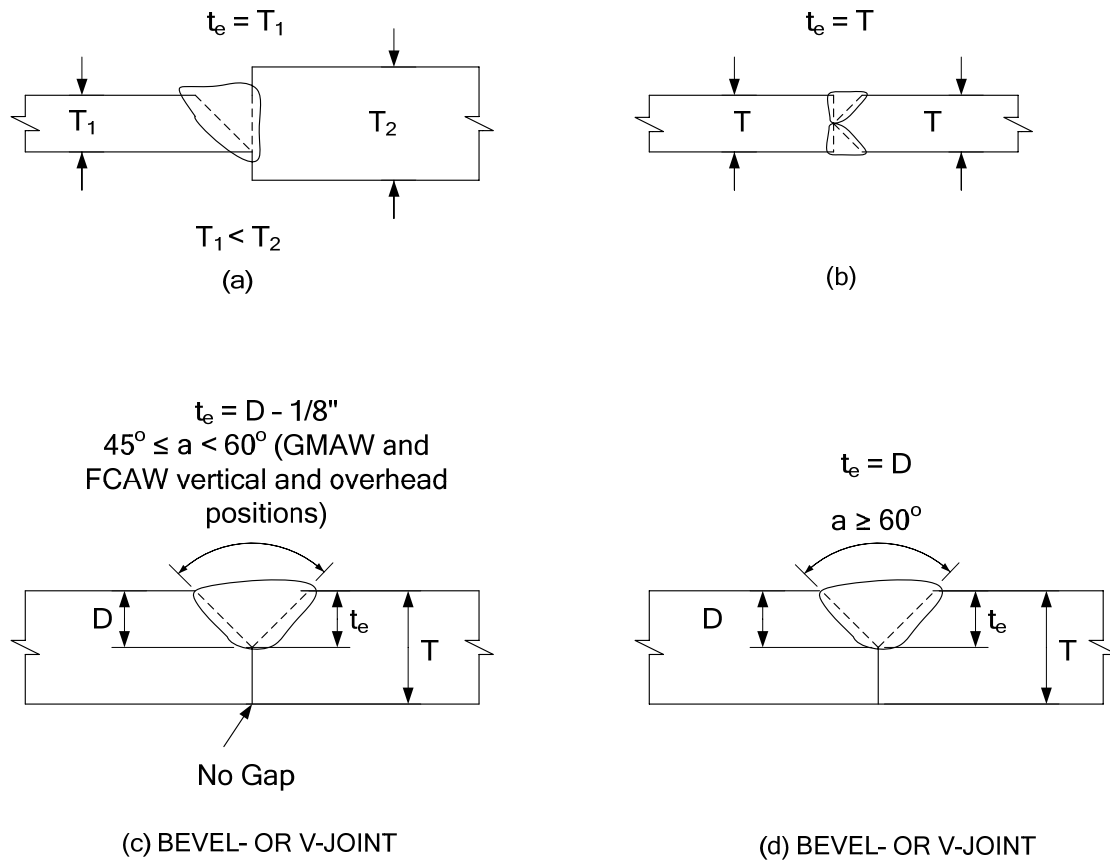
Effective Throat Dimensions for Groove Welds (SMAW, SAW, GMAW & FCAW)
